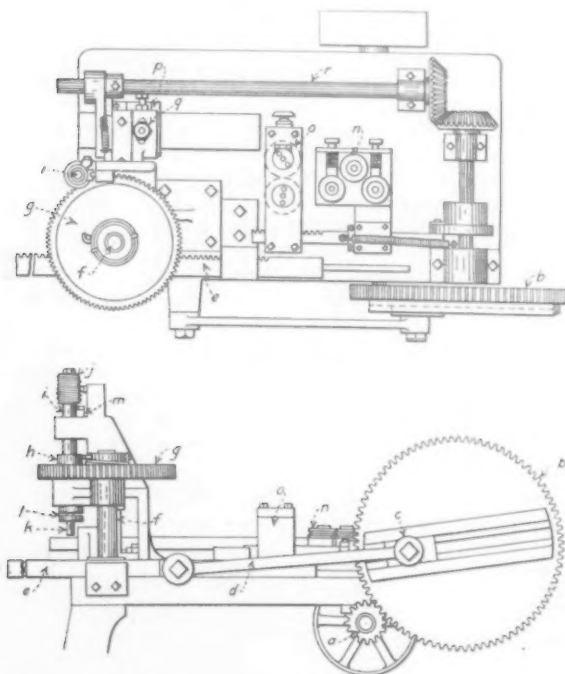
Plan and Elevation Views of the Machine Showing the Mechanical Details
